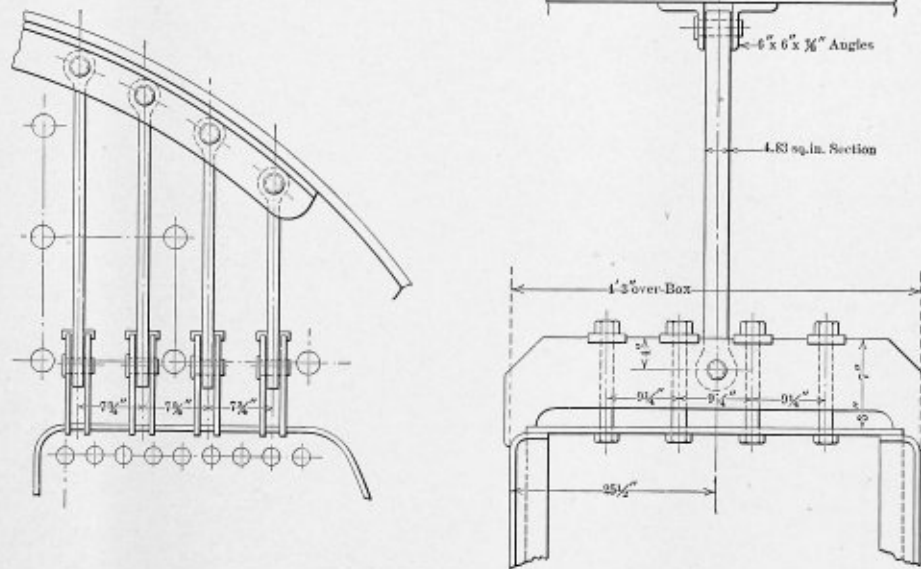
SINGLE HANGING GIRDER STAYS.
